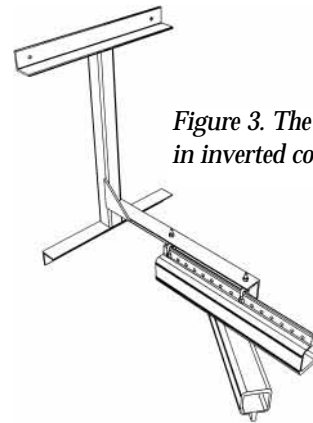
The Zbeam[®] Wall Mount in inverted configuration.
